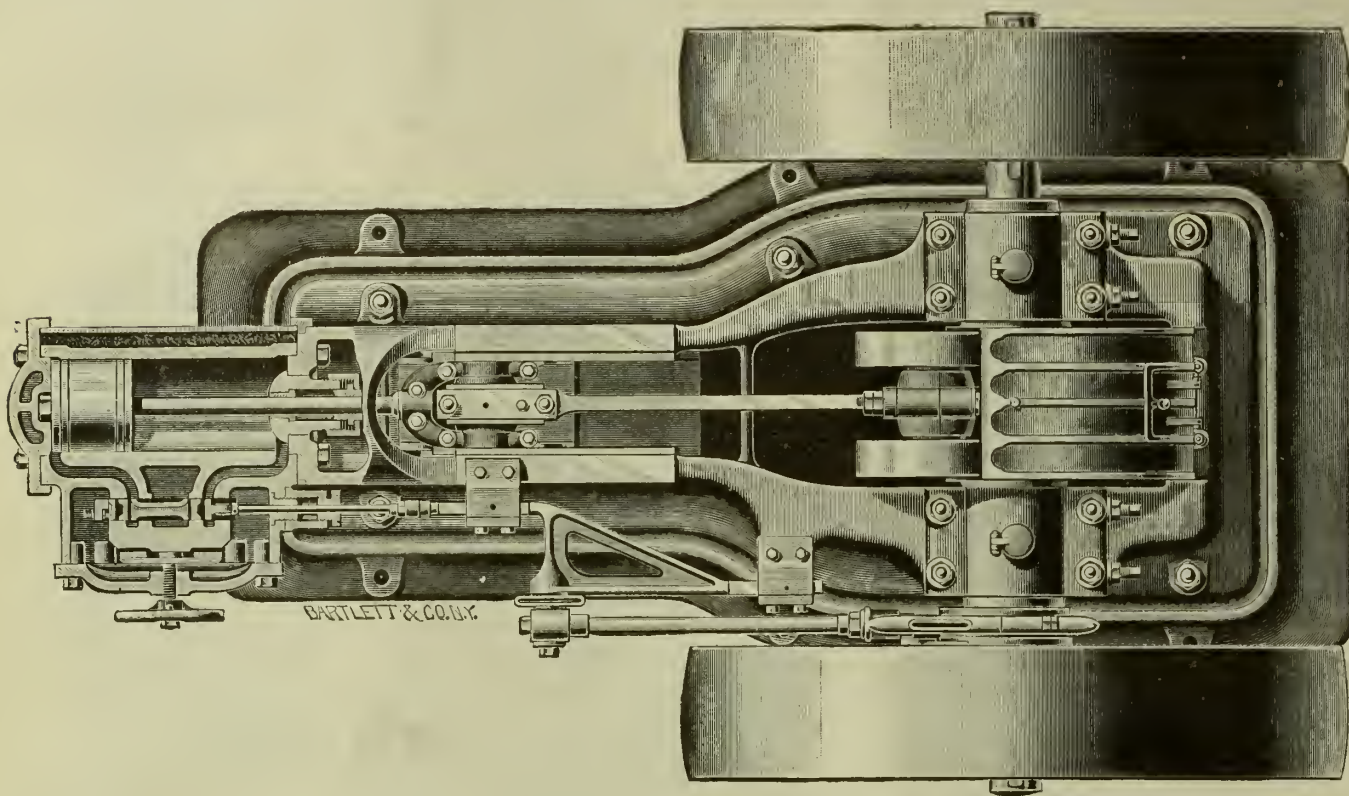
PLAN VIEW OF WESTON AUTOMATIC ENGINE.
